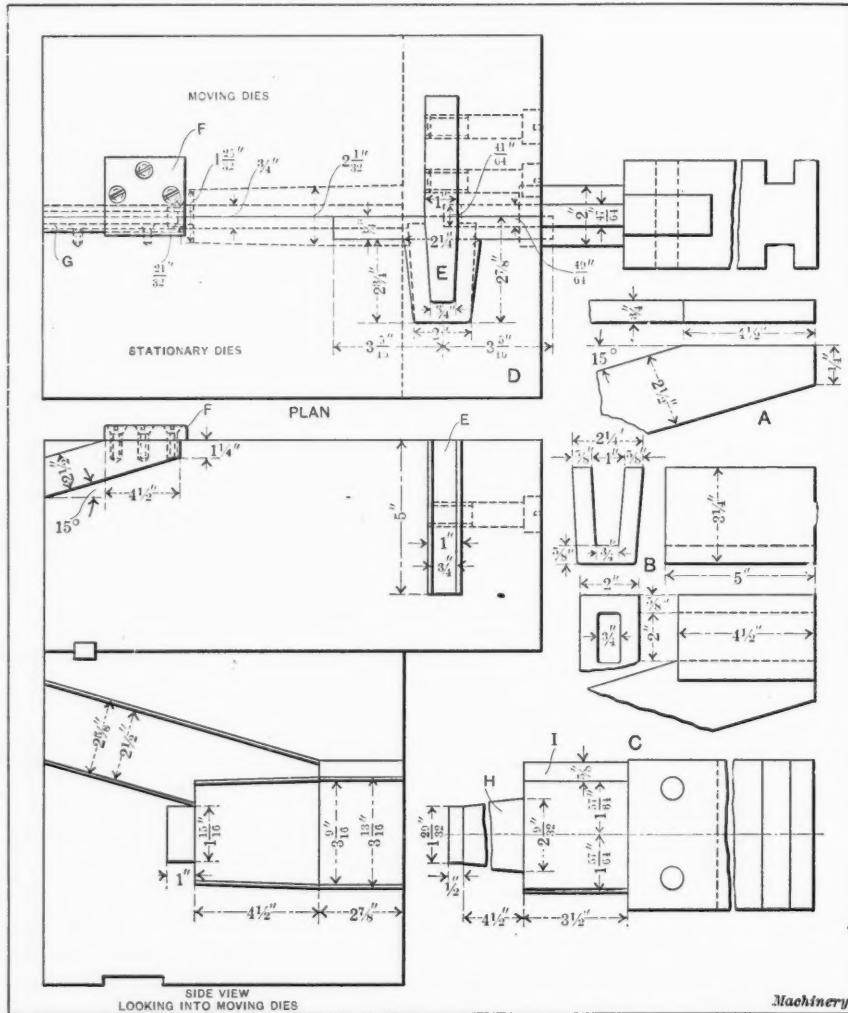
Forging Machine Dies and Tools for making Extension Handles for Grate Shaking Levers
